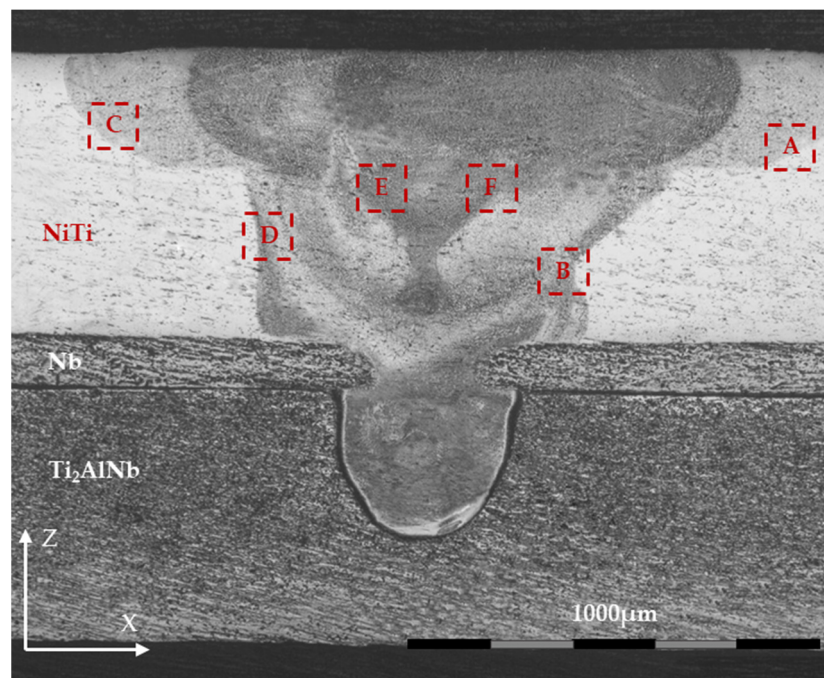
Macro morphology of weld cross section (No. 3 sample).
